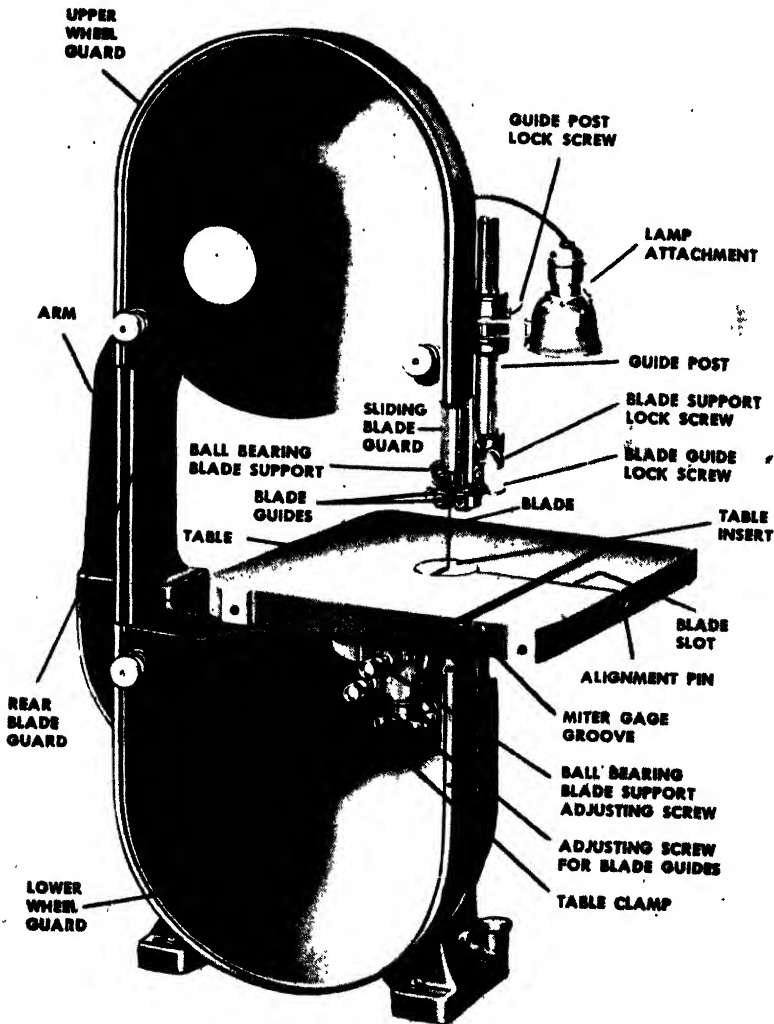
The band saw is especially good for sawing curved and irregular pieces. (Delta Power Tool Division, Rockwell Manufacturing Company)
